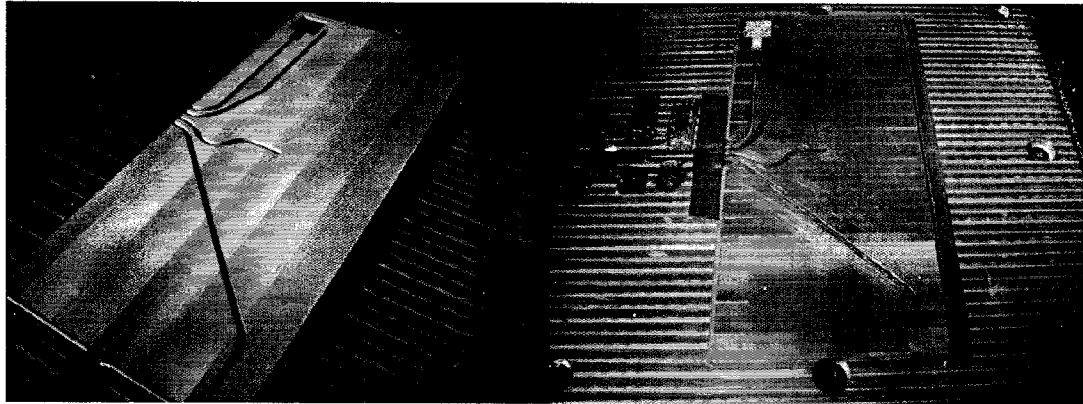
Benchmark panel during fabrication showing the channels for the embedded components (left) and the components inserted and ready for embedding (right)
